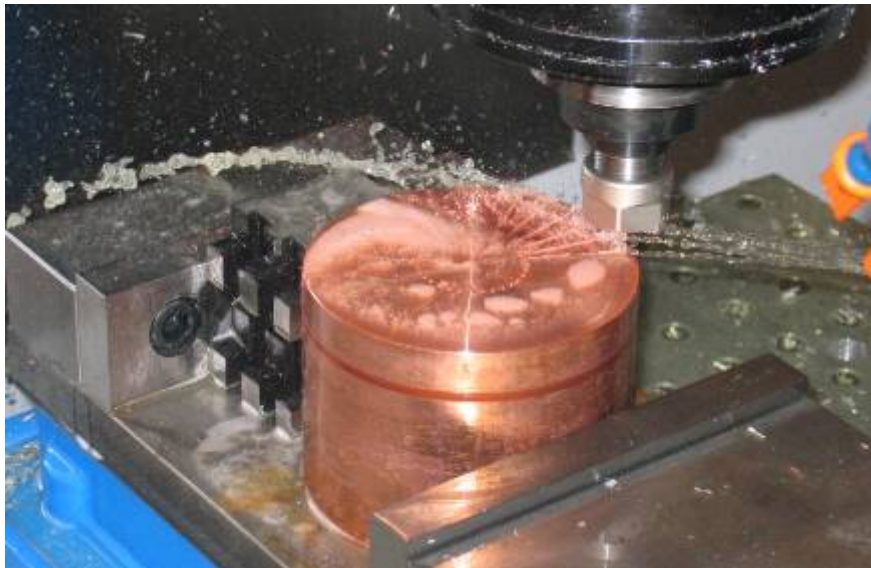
Slots for Thermistor Wires Being Machined into Calibration Part
